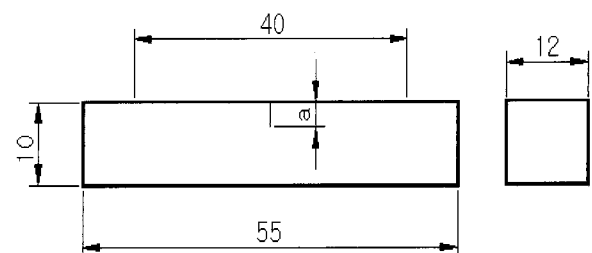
Specimen geometries for Charpy impact test (unit : mm)
